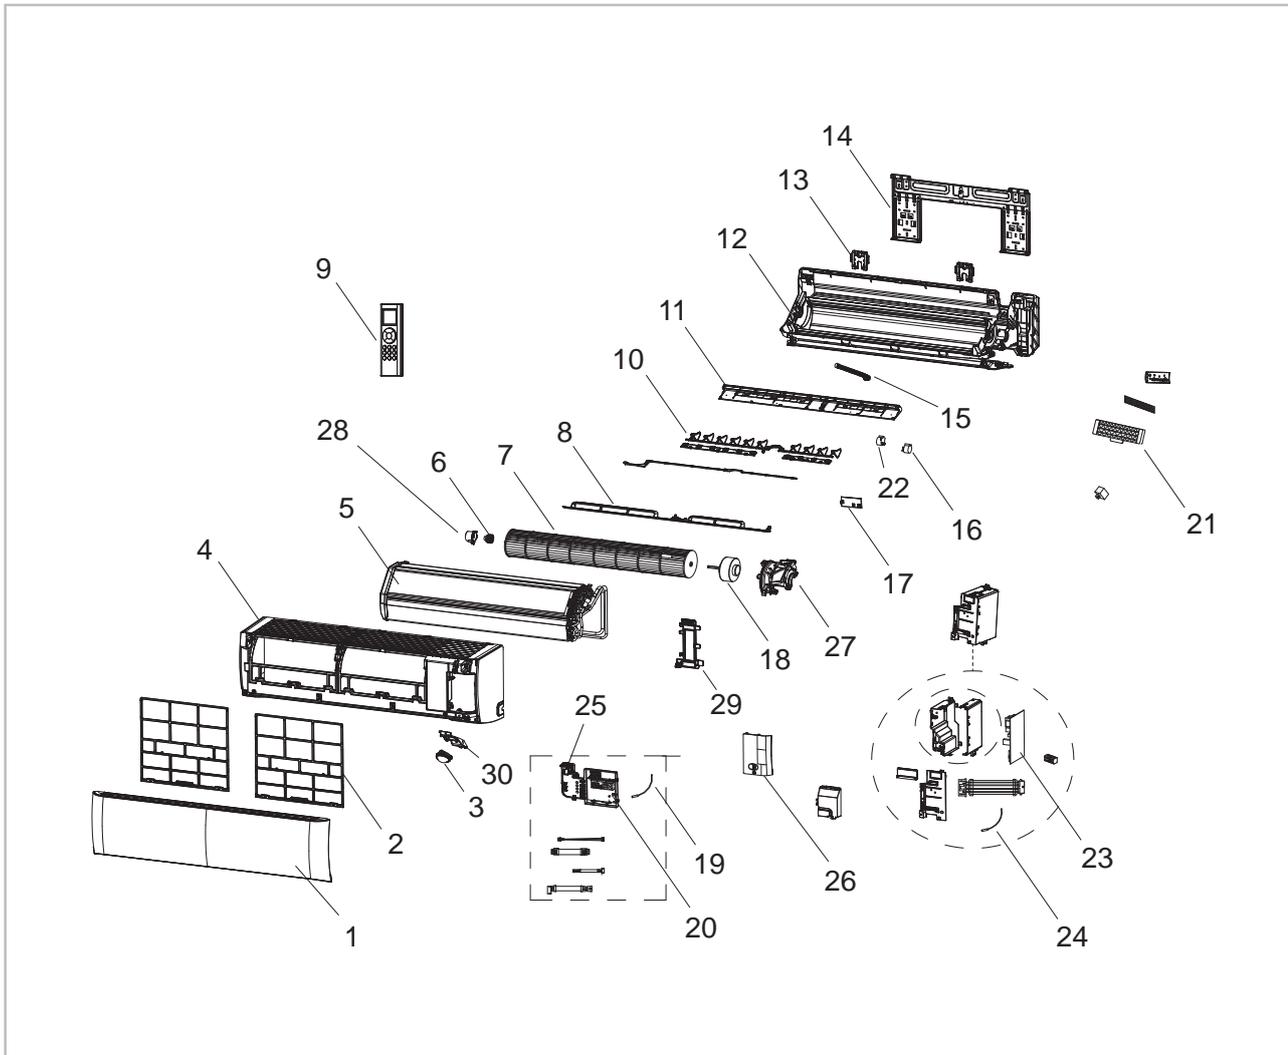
Exploded view of the unit RVT 265-355 DC IT
